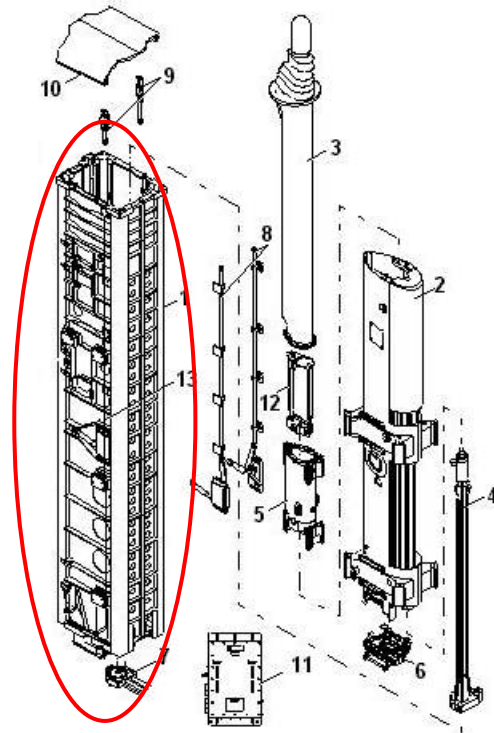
UMM Schematic of Assembly showing guide trunk circled.
